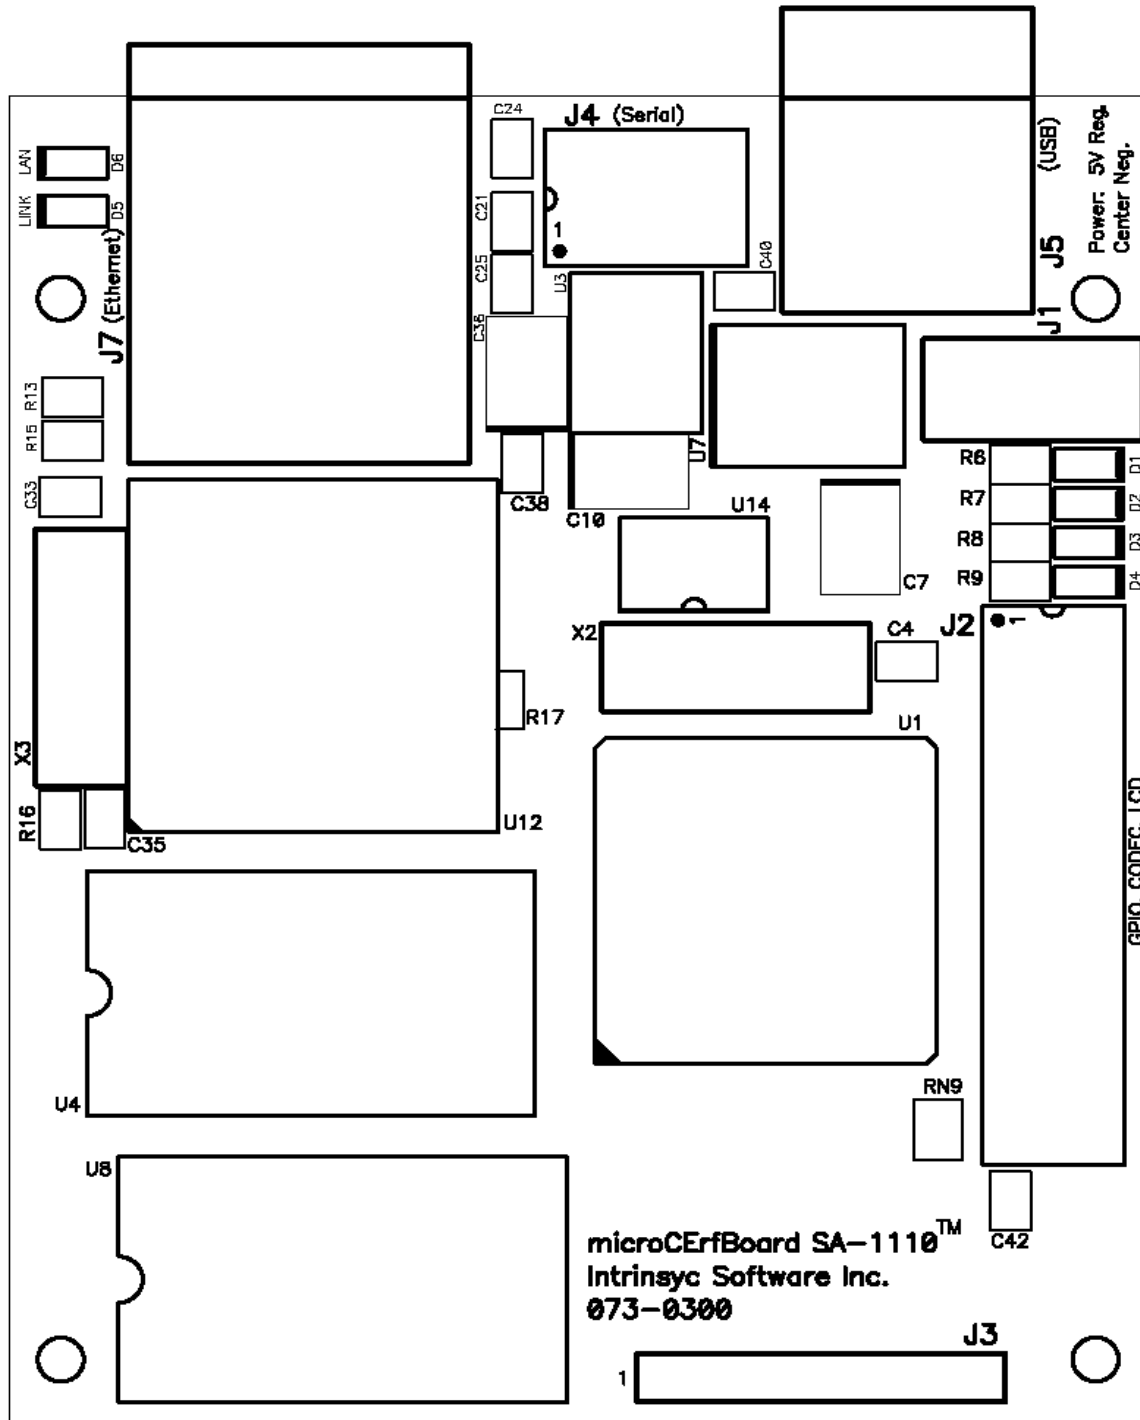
CerfBoard Top Side Parts Placement Diagram
